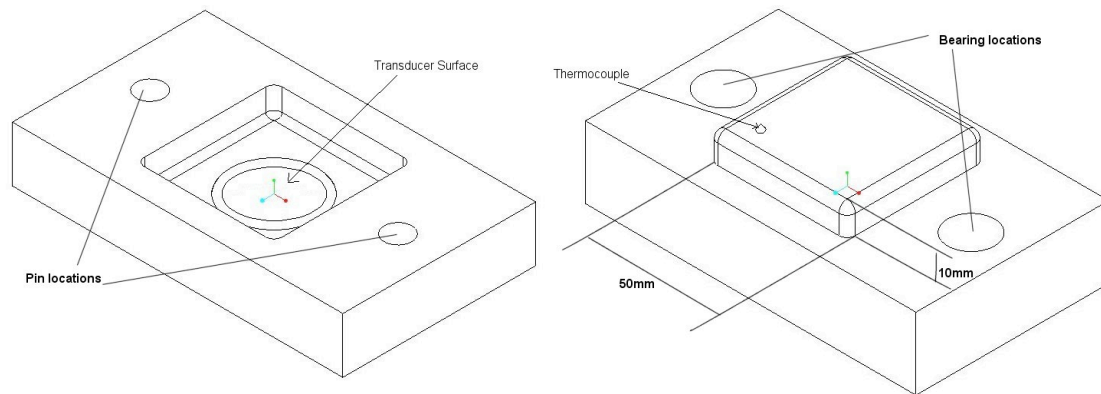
Isometric views of the mould cavity and reflective top faces of the ultrasound experimental jig.
